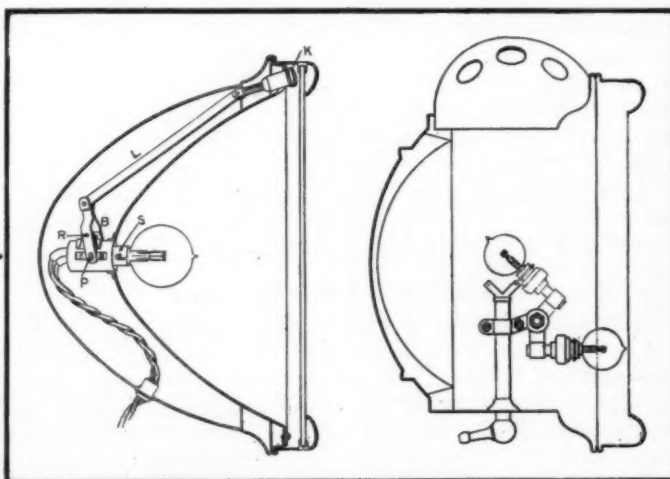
Gray & Davis electric headlight and electric gas attachment
